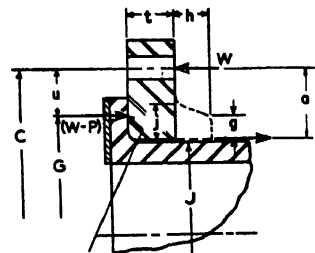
Van Stone or Lap-joint Flanged Fittings.
